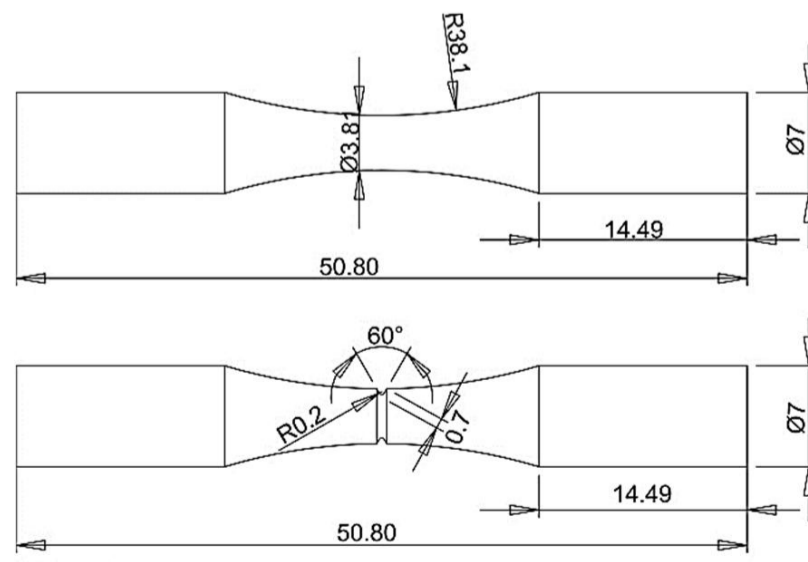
Plain and V-notched specimen geometry for fatigue test
